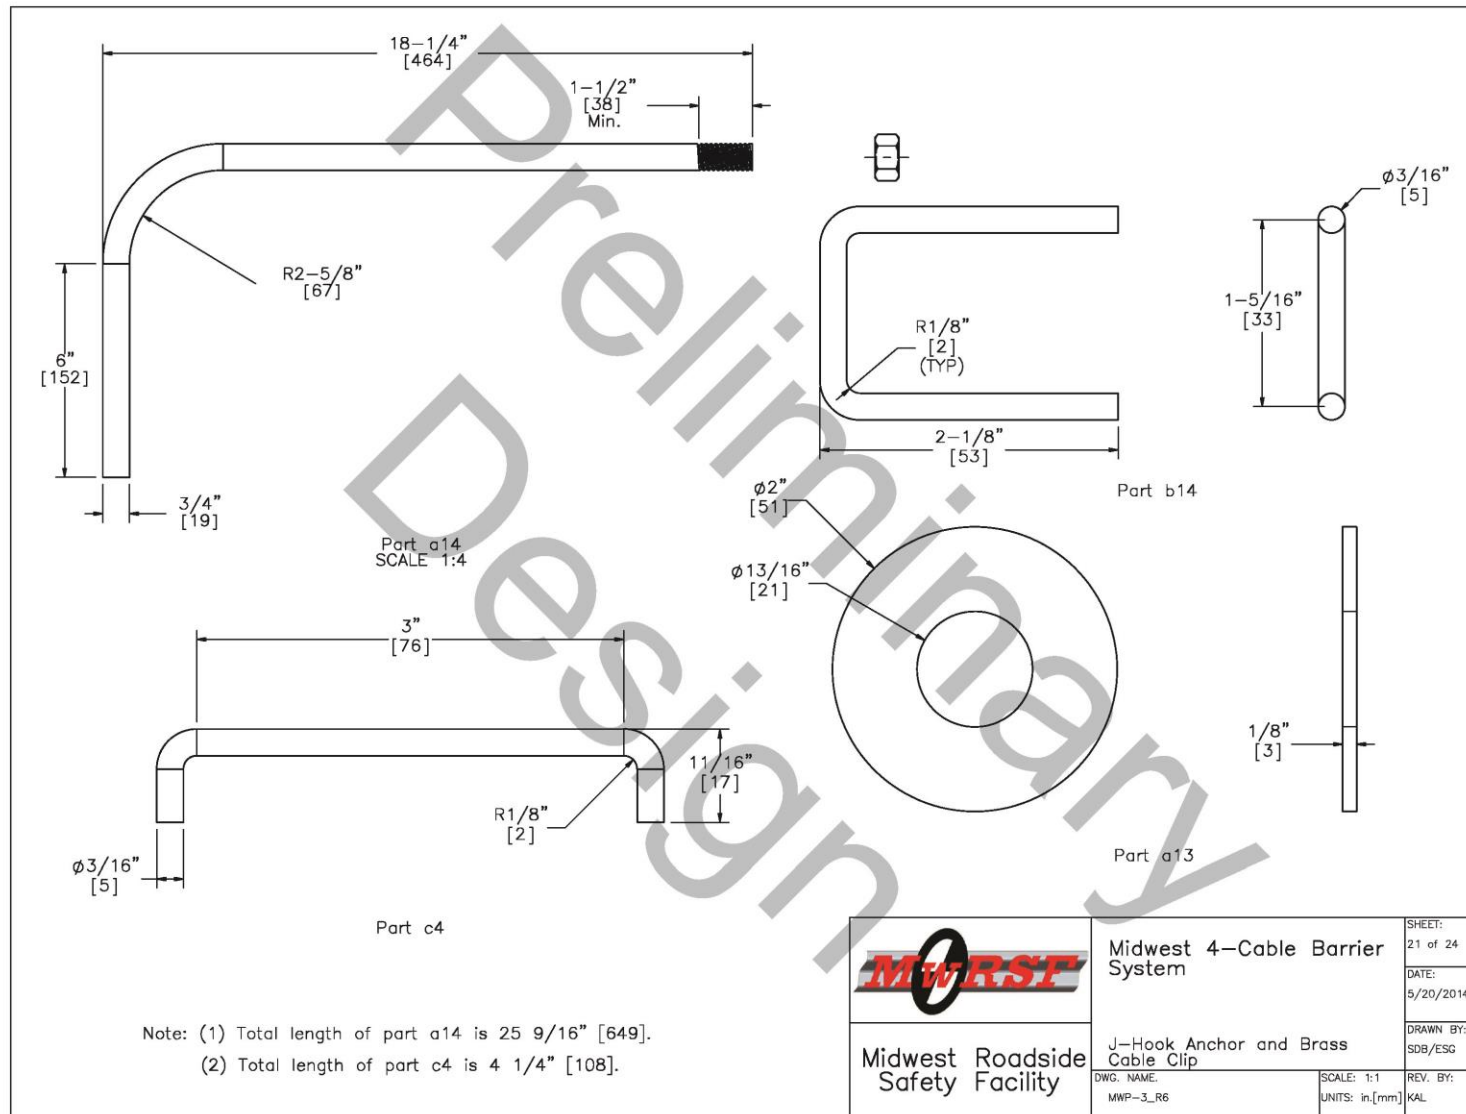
J-Hook Anchor and Brass Clips, Test No. MWP-3
